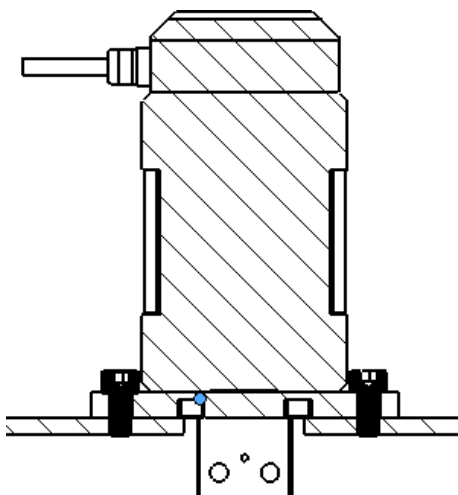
Example of mounting using the mounting flange B (sectional view with highlighted screws)
